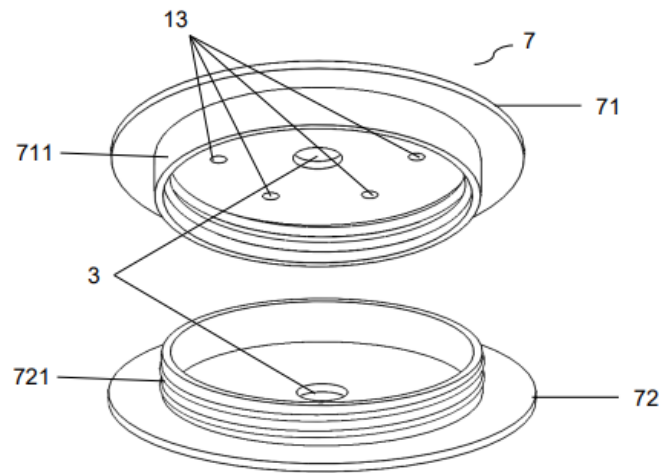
An example open view of the winding spool in another embodiment of the invention.
